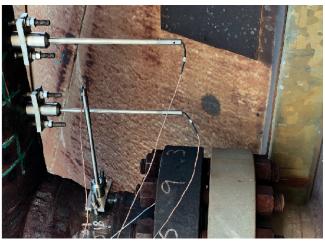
Ultra-High-Temp UT Sensors attached with stud welded clamp.
